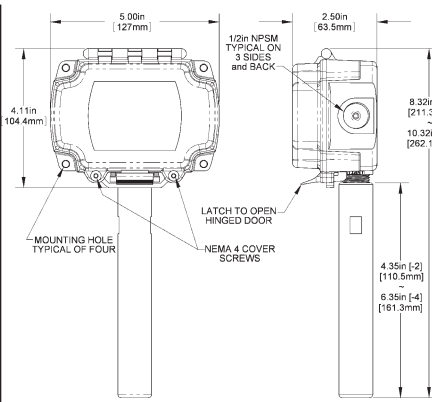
BB, 2" & 4" Buffer w/plastic Threaded Fitting
